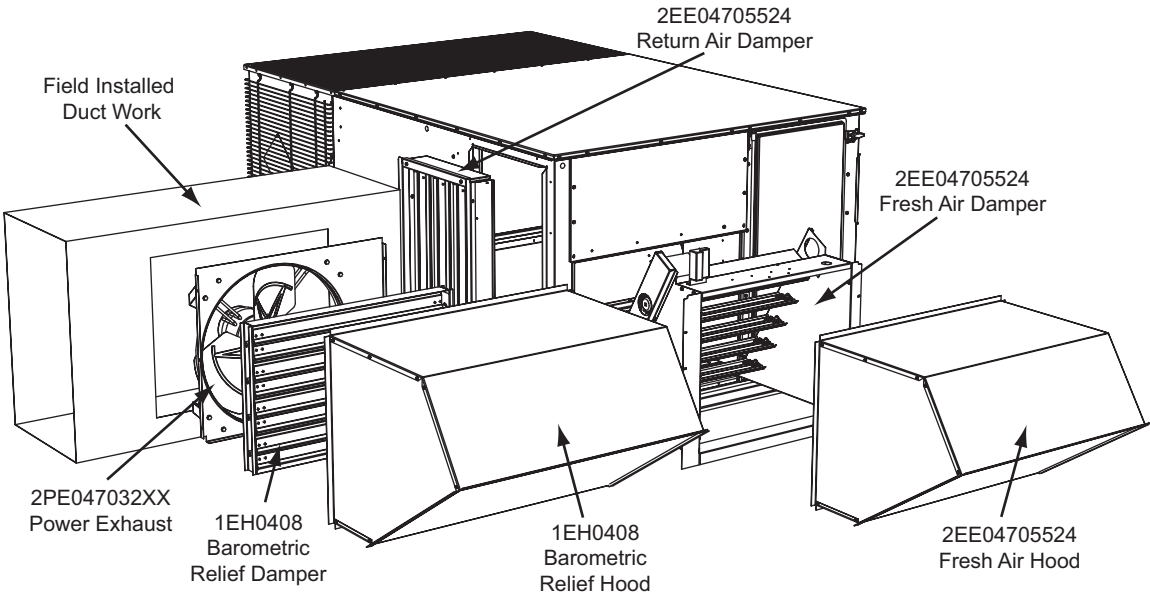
FIELD INSTALLED HORIZONTAL ECONOMIZER W/POWER EXHAUST
